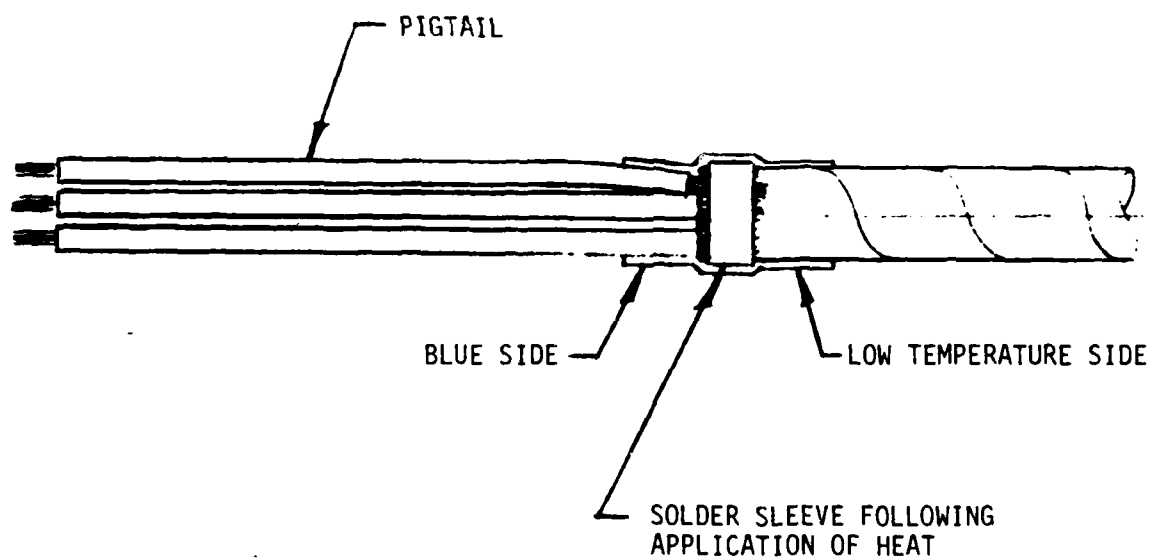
APPLYING THE SHIELD SOLDER SLEEVE
